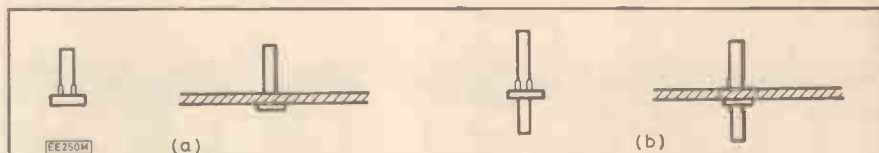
(a) Single-sided and (b) double-sided printed circuit pins. Both types are inserted from the underside of the board.
